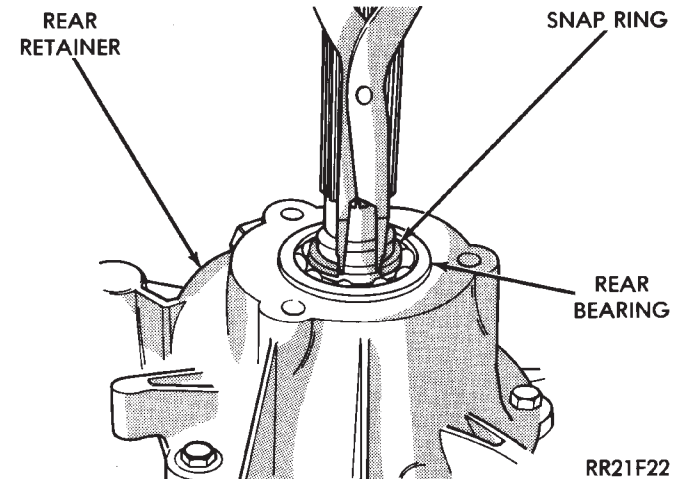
Installing Output (Rear) Bearing Snap Ring
